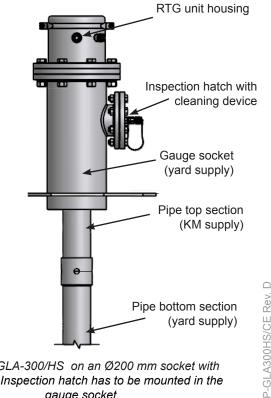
GLA-300/HS on an Ø200 mm socket with standpipe. Inspection hatch has to be mounted in the gauge socket.
